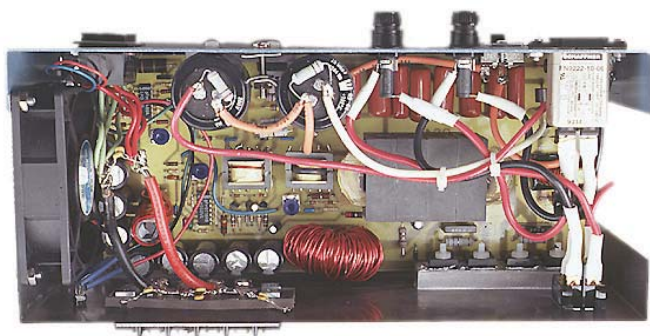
Photo of top of PCB mounted in cabinet.
